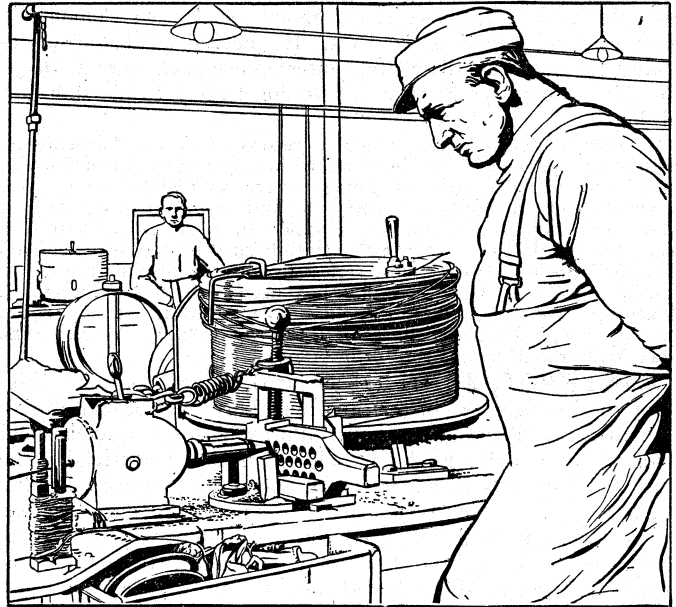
WIRE-DRAWING BLOCK, PLATE AND SOAP-BOX
